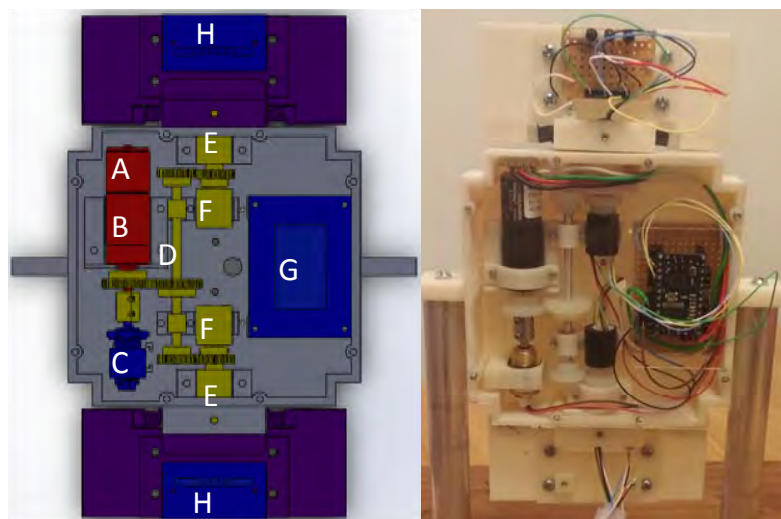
CAD Assembly (Left) and Assembled Prototype (Right)
